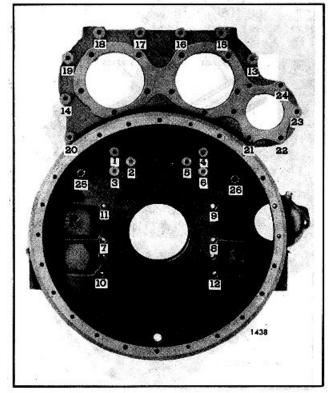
Flywheel Housing Bolt Tightening Sequence (Operation 1)
